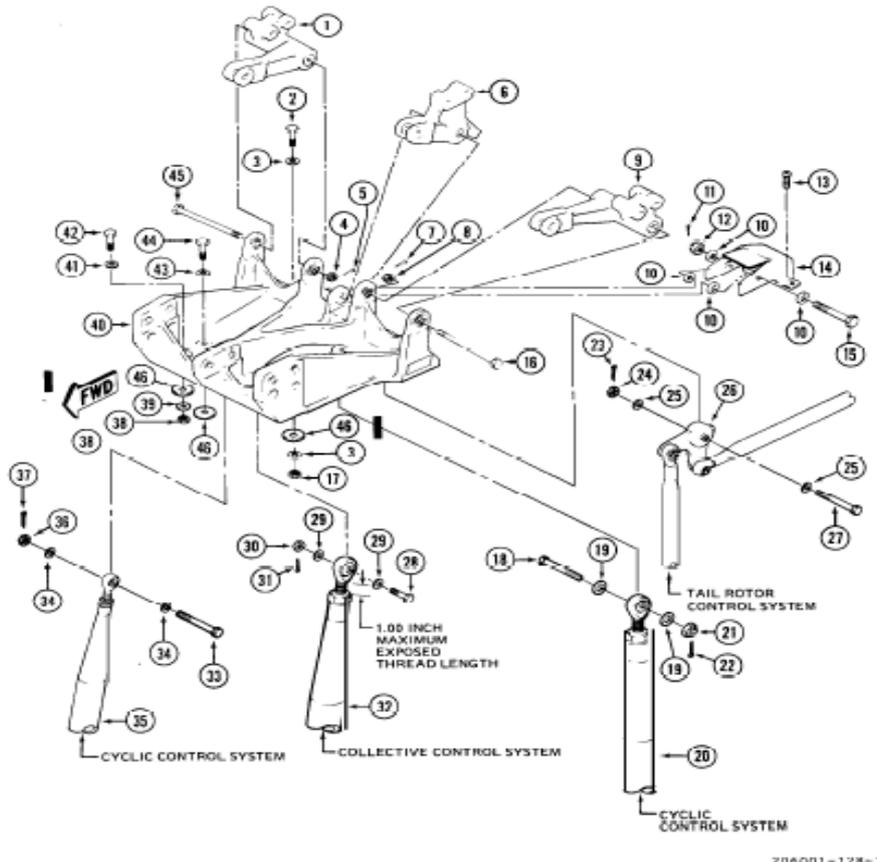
B. Servo actuator support assembly (206-001-520) (Sheet 1 of 2)
